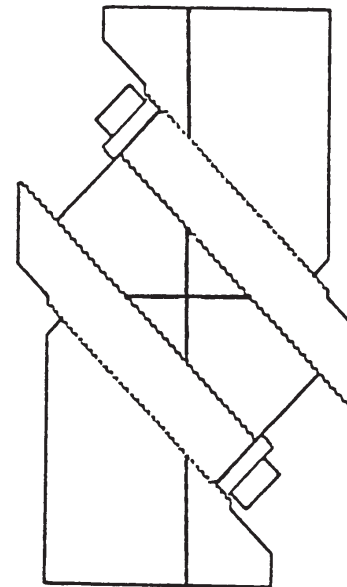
Proper Positioning of Test Specimen and Shear Jaws on Angle Supports
